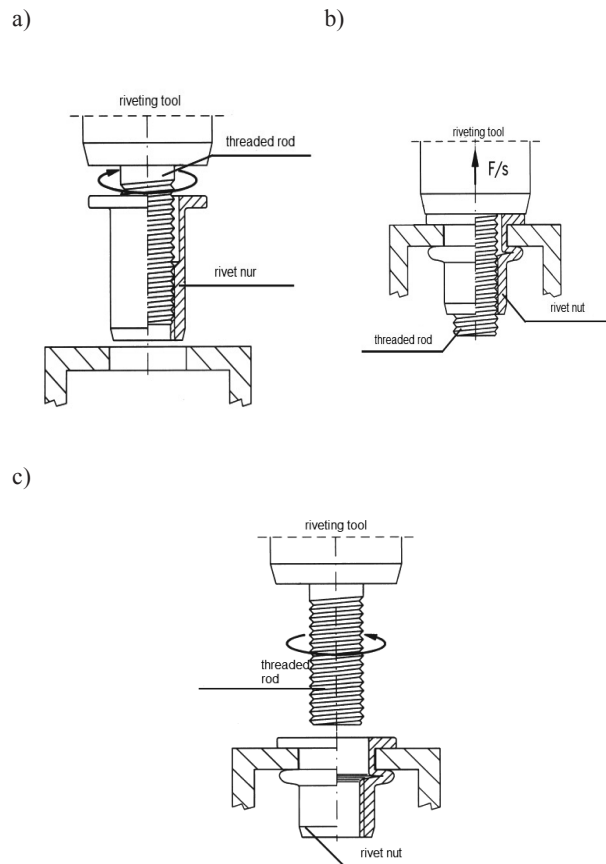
Rivet nut mounting procedure, a) placement of the rivet nut, together with the tip of riveting tool, into drilled hole, b) clamping flange of rivet nut in the hole, c) unscrewing the tip of riveting tool
